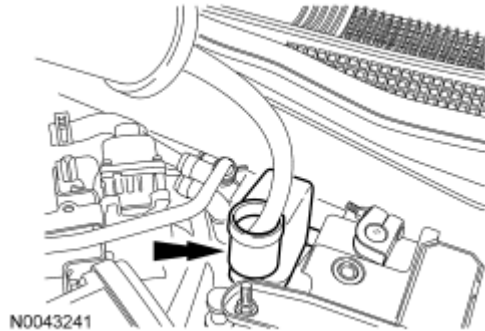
Locating Brake Fluid To Clutch Reservoir Hose
